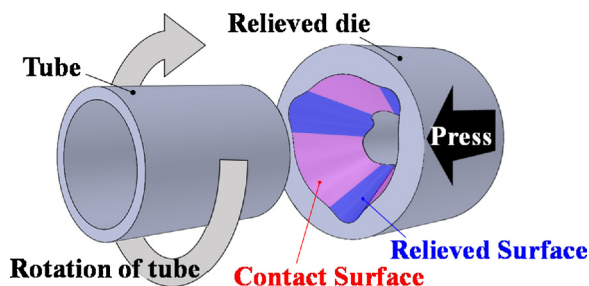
Rotary nosing with relieved die for reduction of tube tip.
